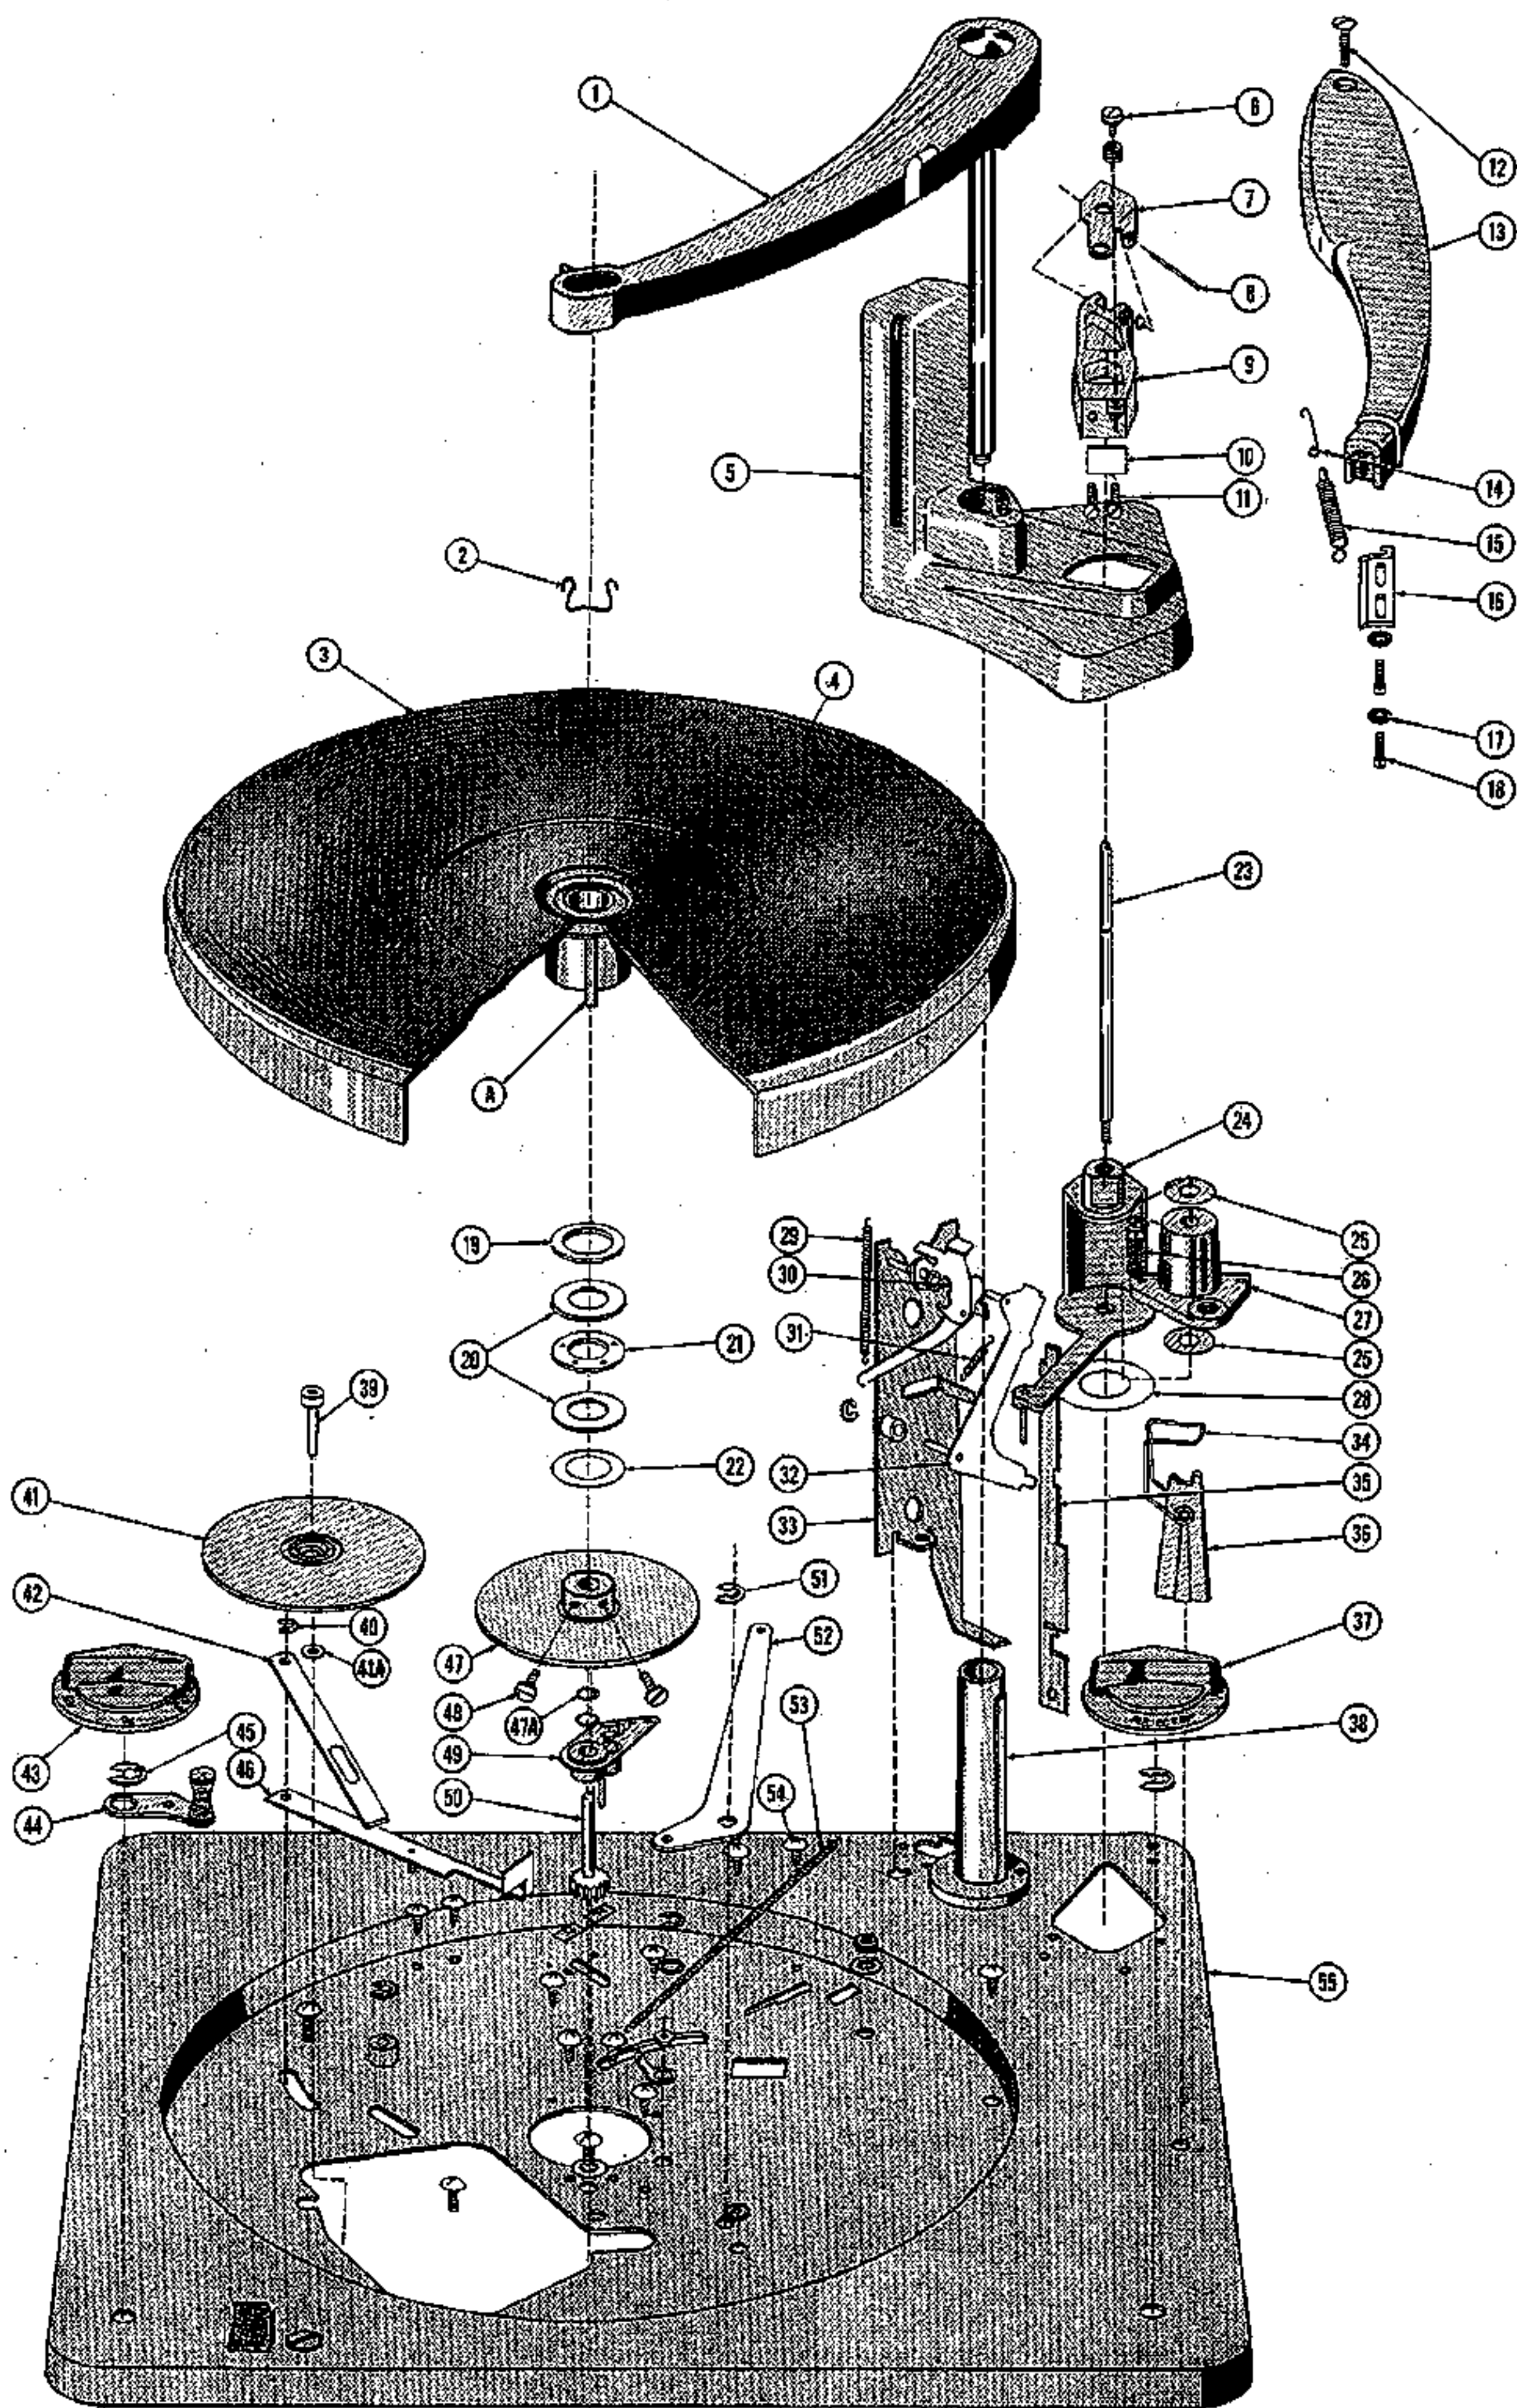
A. EXPLODED VIEW OF PARTS ABOVE BASEPLATE.
